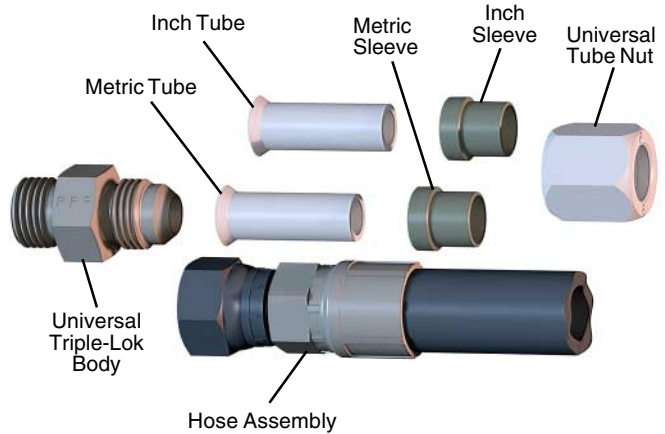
Triple-Lok’s Adaptability to Inch Tube, Metric Tube, or Hose Assemblies
